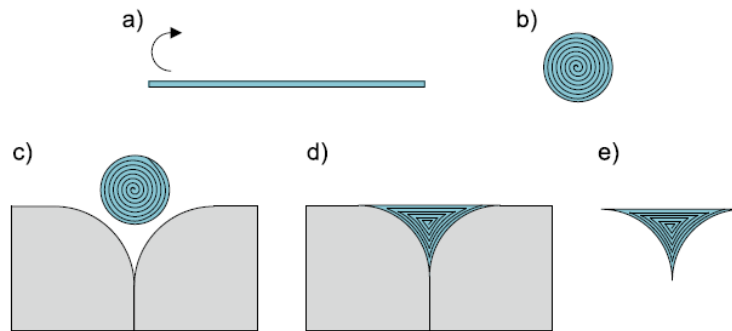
Rolled UD filler manufacturing process a) UD prepreg b) rolled UD c) tool d) noodle formed into tool e) rolled UD filler [65]
